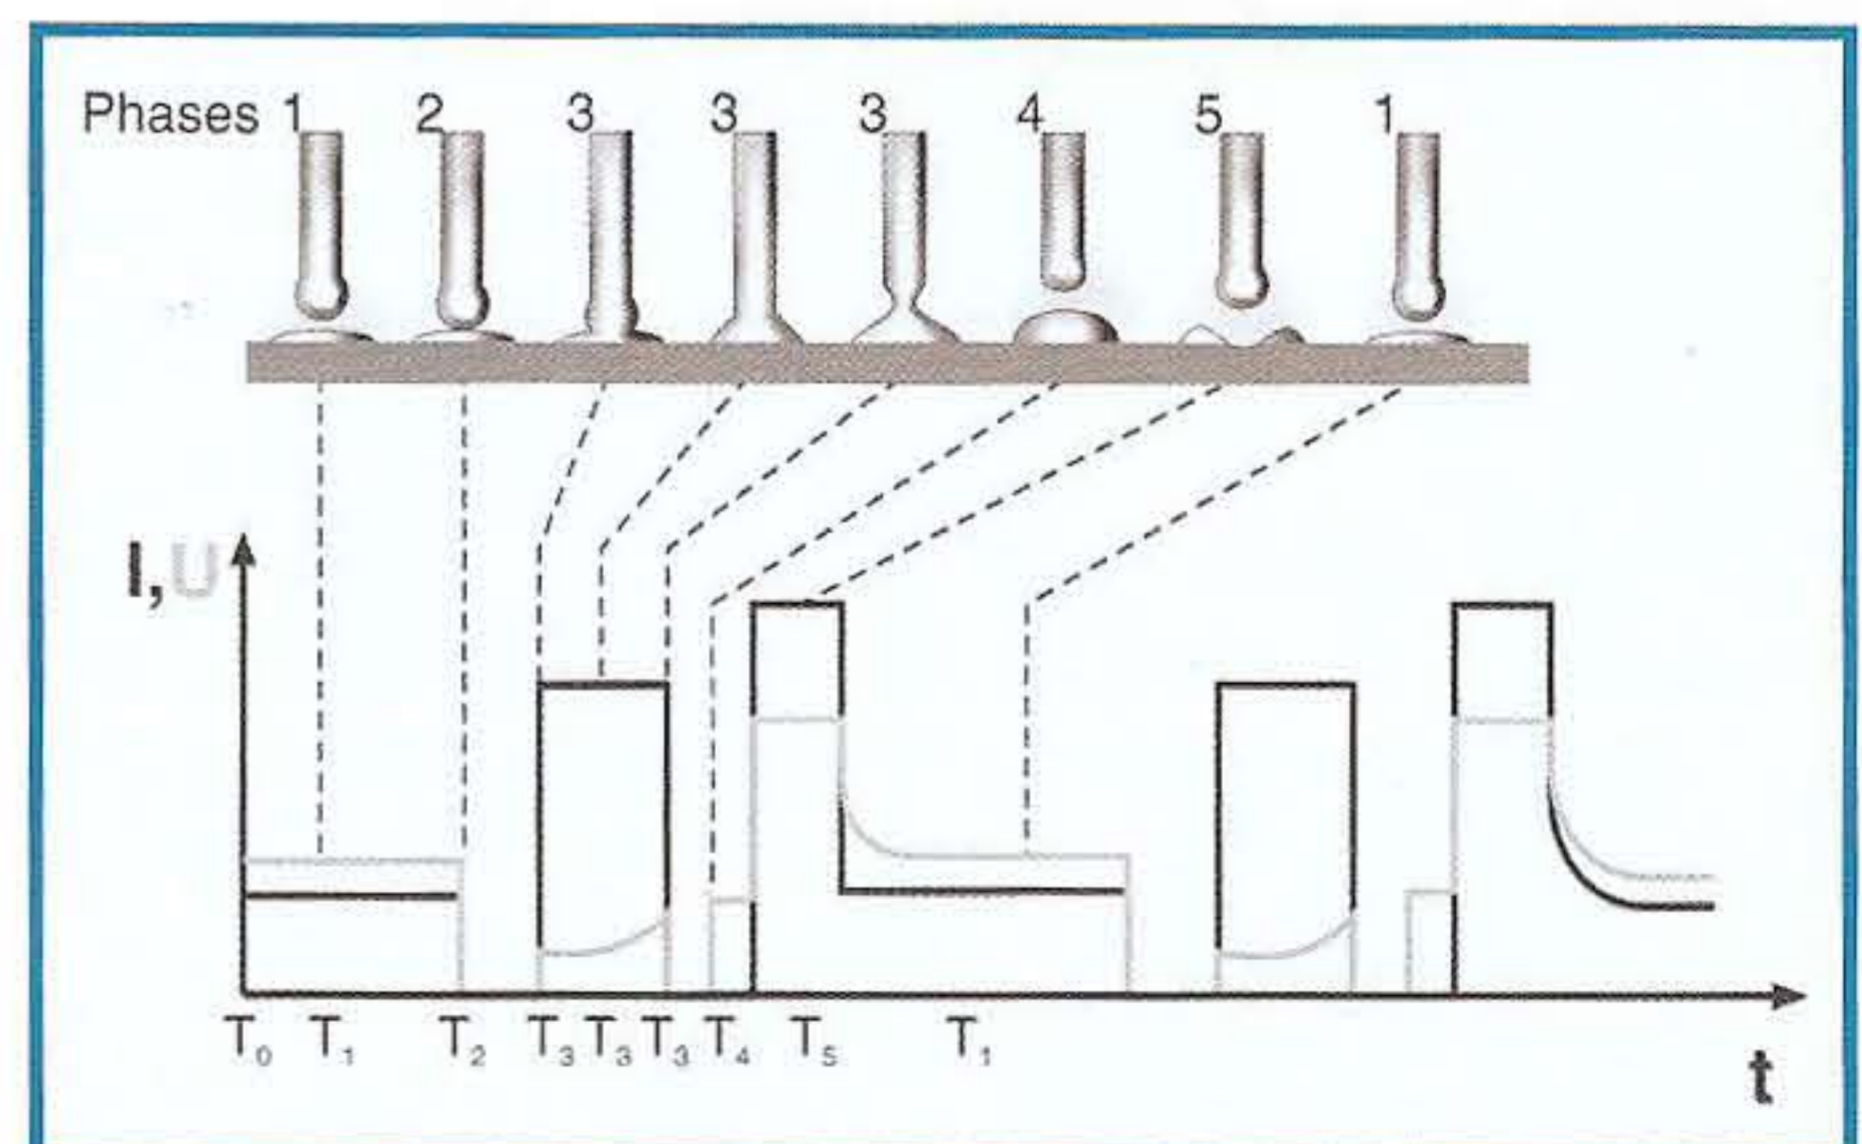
Fundamentals of current-controlled short-circuiting MIG/MAG welding.
